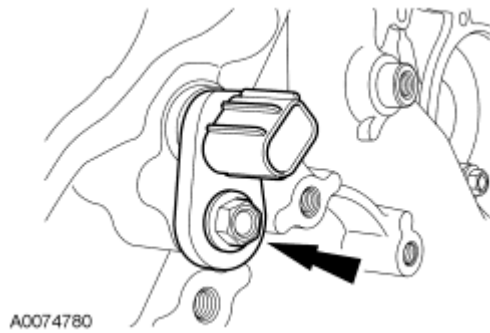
Locating Camshaft (CMP) Sensor Bolt
